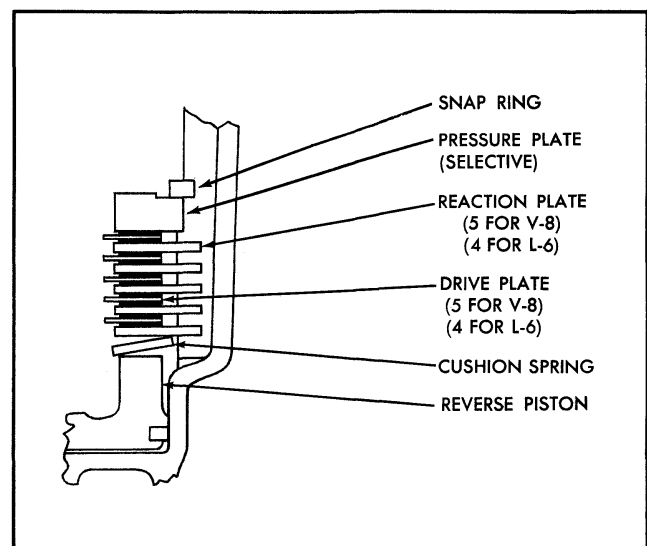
B-121 Reverse Clutch Pack Assembly Sequence
